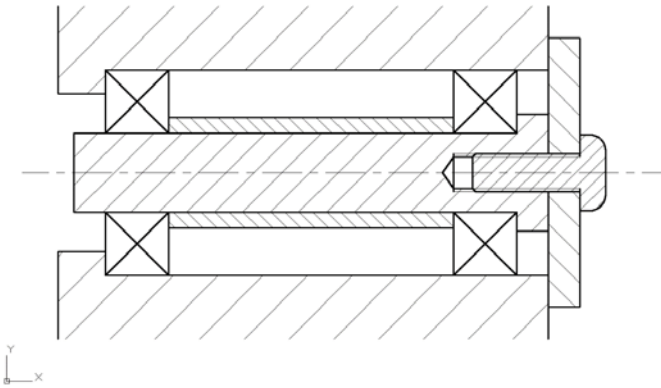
Drawing of the bearing-shaft assembly for the connection of the ring.
